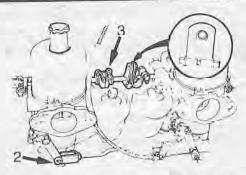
Control couplings on multiple carburettor installations (Sec 9)
